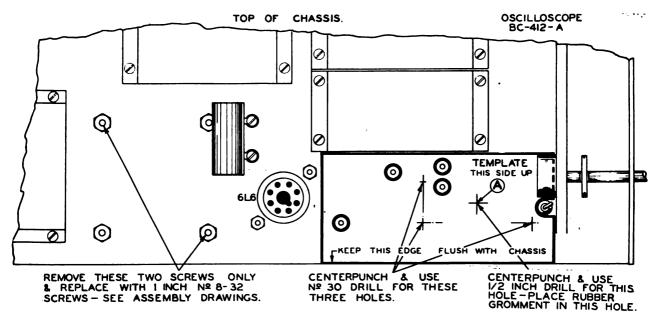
Drilling template for mounting blockout chassis on Oscilloscope BC-412.
